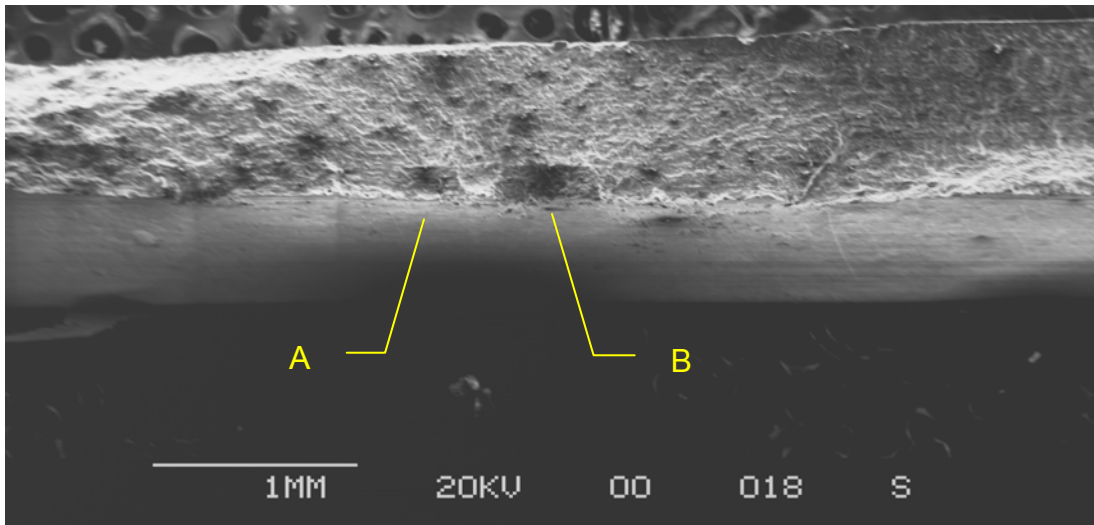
Fatigue Crack on Fracture Surface of Specimen 5933.
